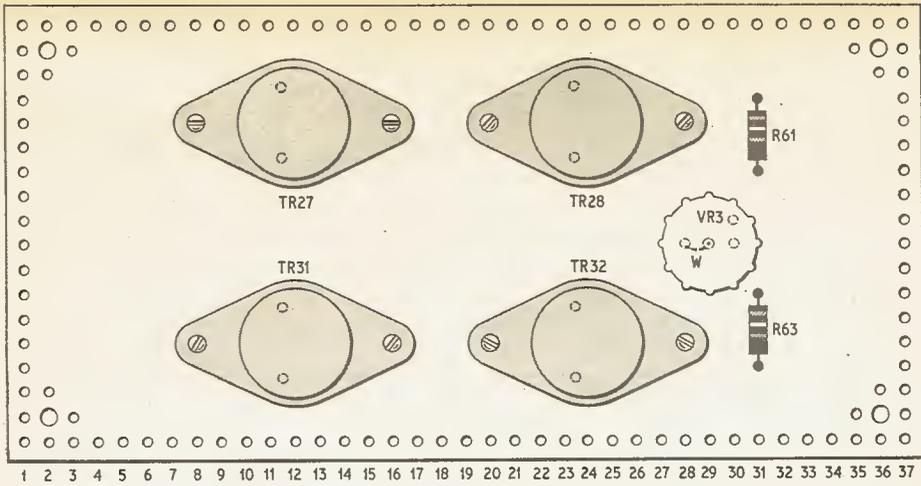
Top view of the motor control board. The board should be drilled to accommodate the OC35 mounting screws and the base and emitter pins. Mounting holes for the board are made at each corner to line up with the Meccano mounting strips
